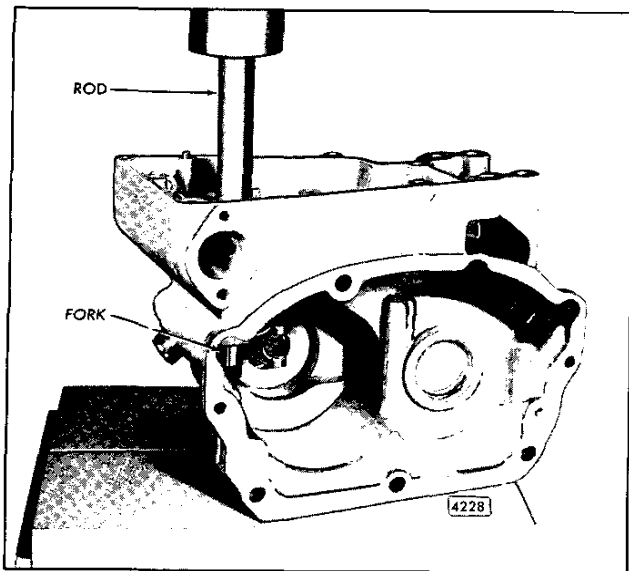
Installing Governor Operating Shaft Fork Operating Shaft and Bearing Assembly Using Tools J 21995-1 and J 21995-2
